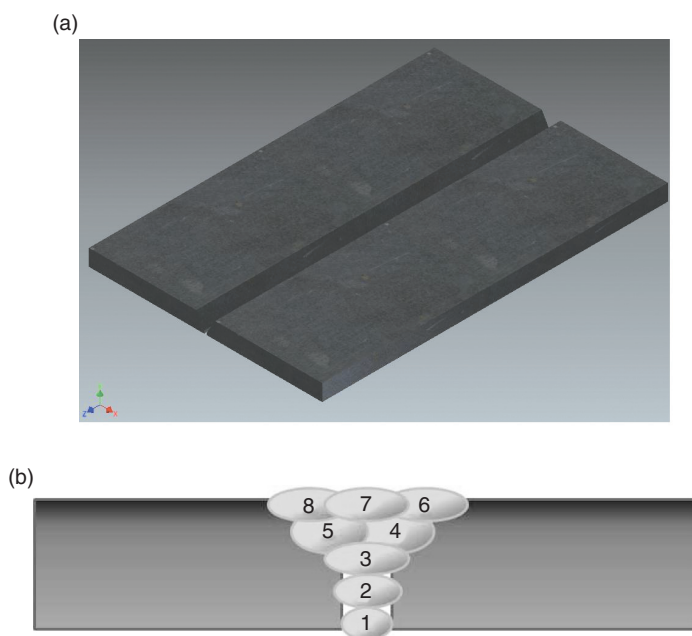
Welded joint; (a) sheet and groove representation and (b) welding sequence.
